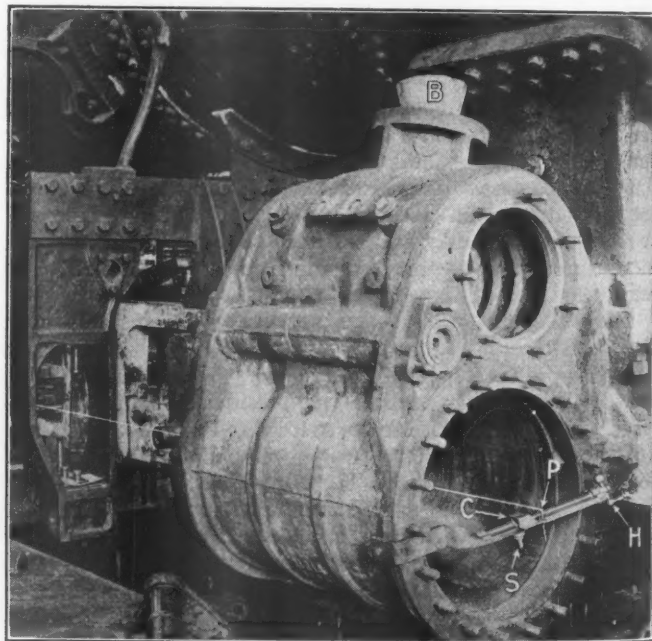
Convenient Jig for Holding and Adjusting Cylinder Center Line
